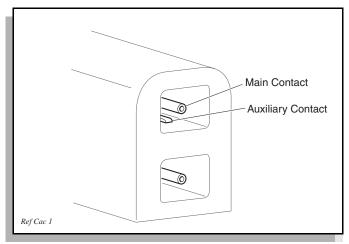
Cleaning Auxiliary Contact in Charger Plug
